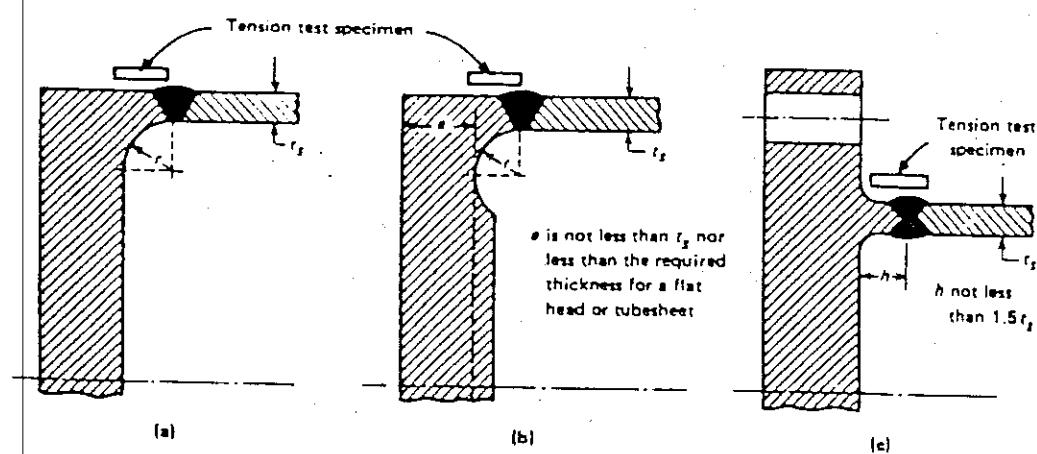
ATTACHMENT OF PRESSURE PARTS TO FLAT PLATES TO FORM A CORNER JOINT (CONT'D)
